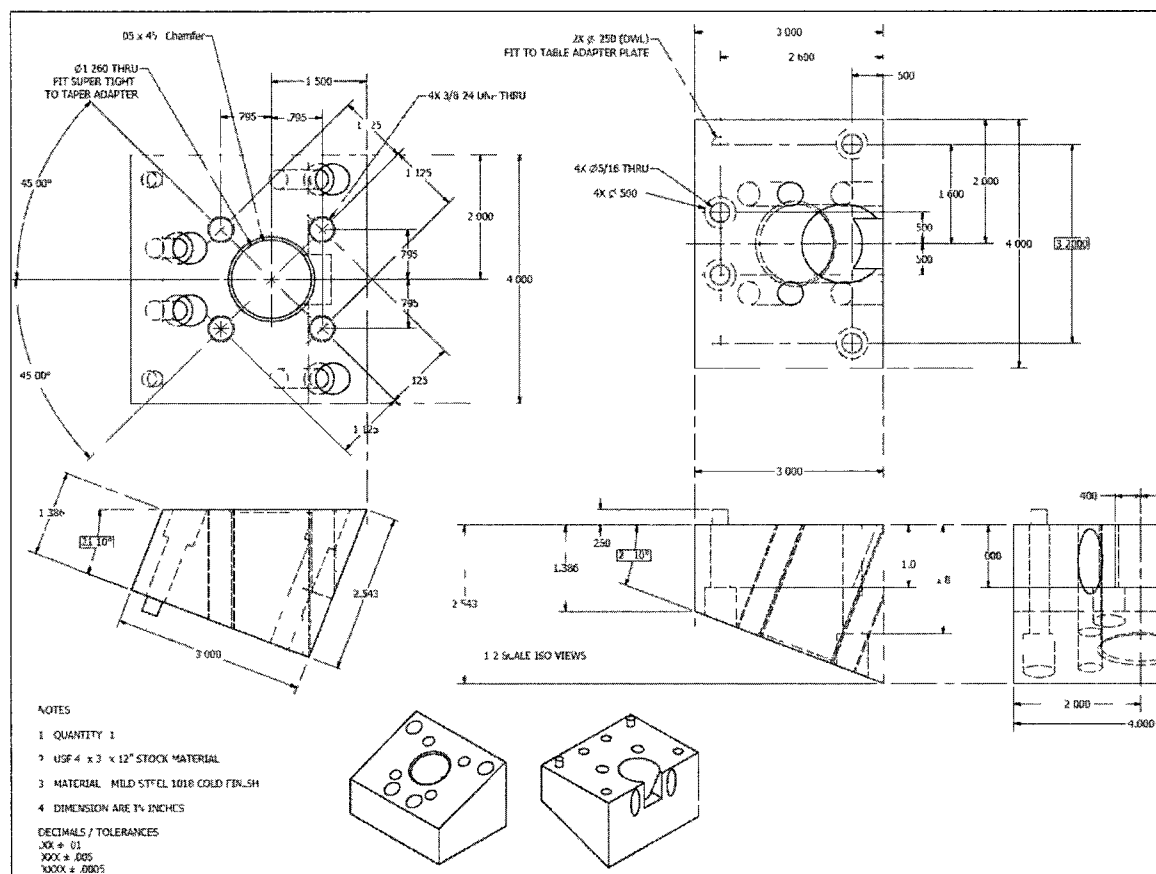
Off-Center System Wedge Adapter CAD Drawing, 2 of 2
